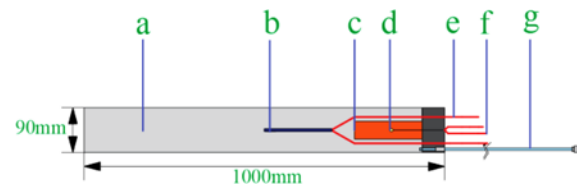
Structure Diagram of L-1000 Dry Ice Powder Cracker (a: dry ice powder cabin b: heating rod c: CO₂-EA d: detonator e: heating wire f: detonating wire g: safety conduit)
